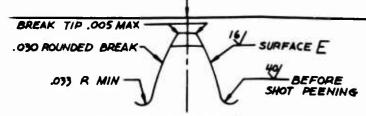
Fatigue Test Gear Configuration 12—EX-78783.
